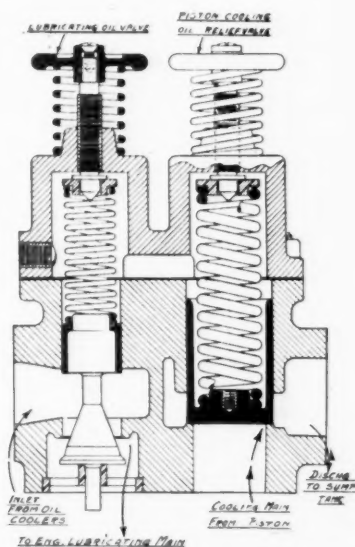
Oil pressure regulating and relief valve. By means of the pressure reducing valve at the left, the oil pressure on the bearing is reduced to about 20 lbs. per square inch at 200 r.p.m., and increases to a maximum of 30 lbs. at 450 r.p.m. of the engine. The right hand member is set to protect the oil system from any pressure above 50 lbs.
